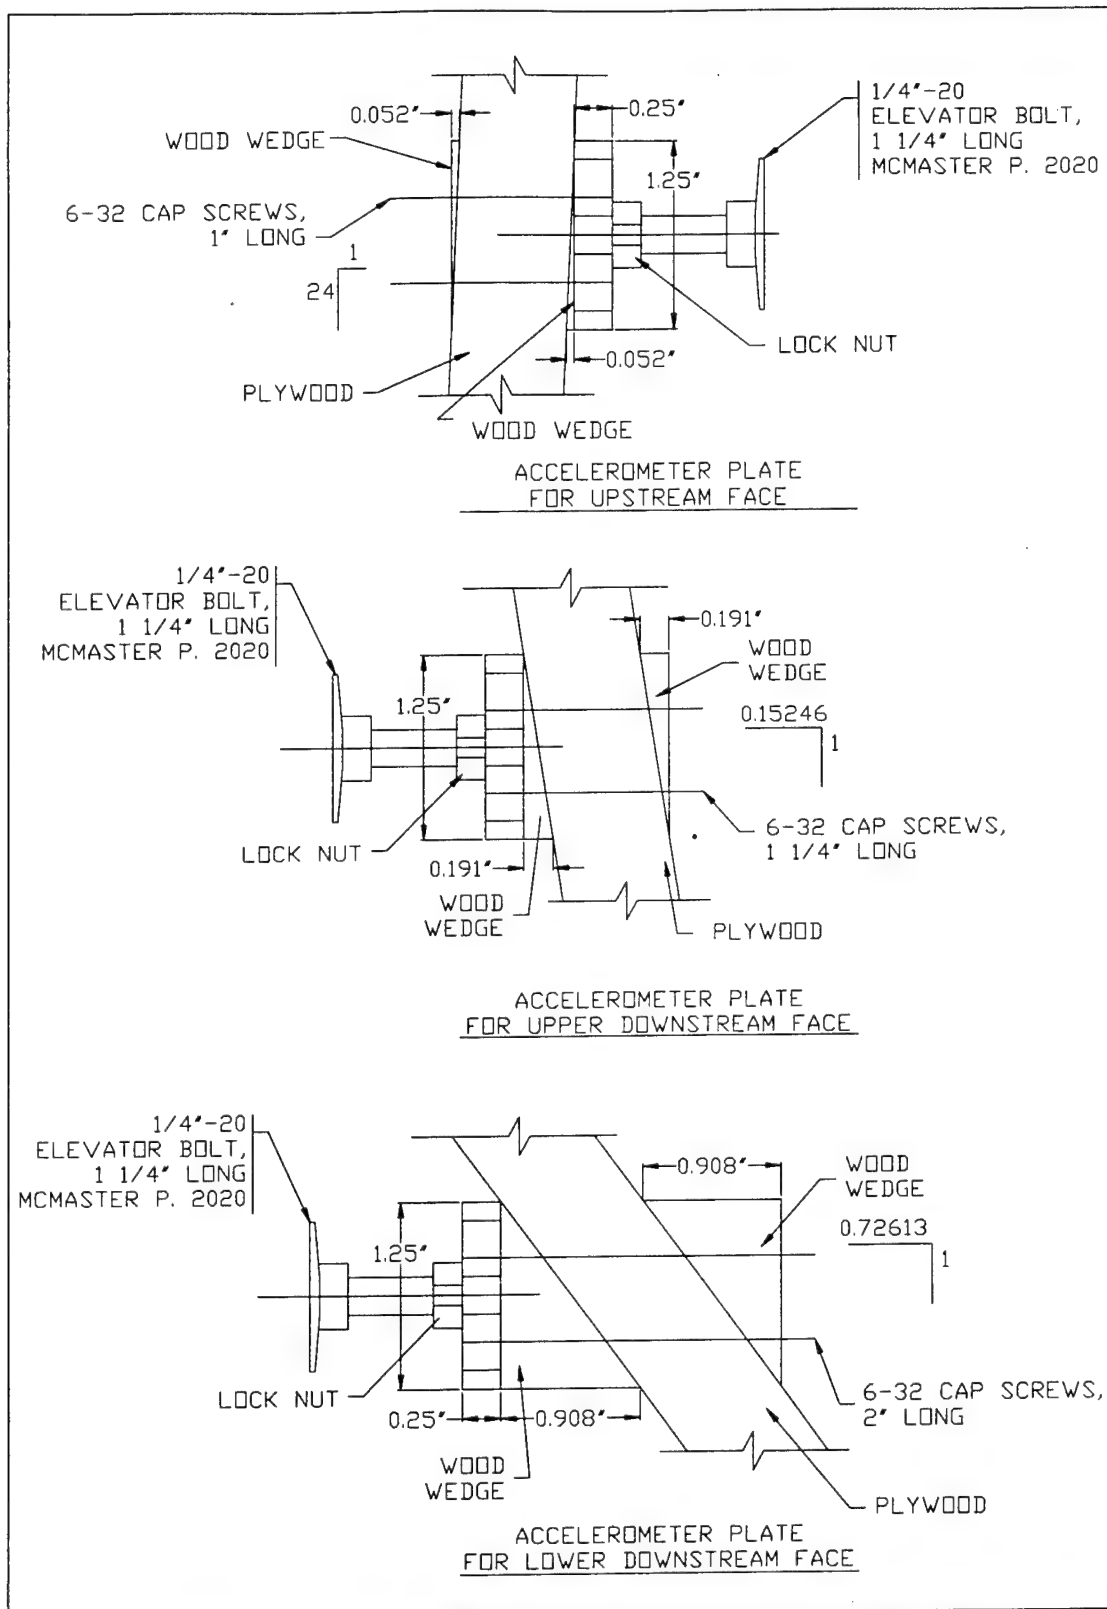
Elevation cross-section views of accelerometer plates for the upstream and downstream faces.
